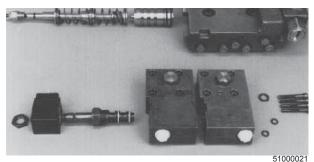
H1•H2 and K1•K2 Control Components
